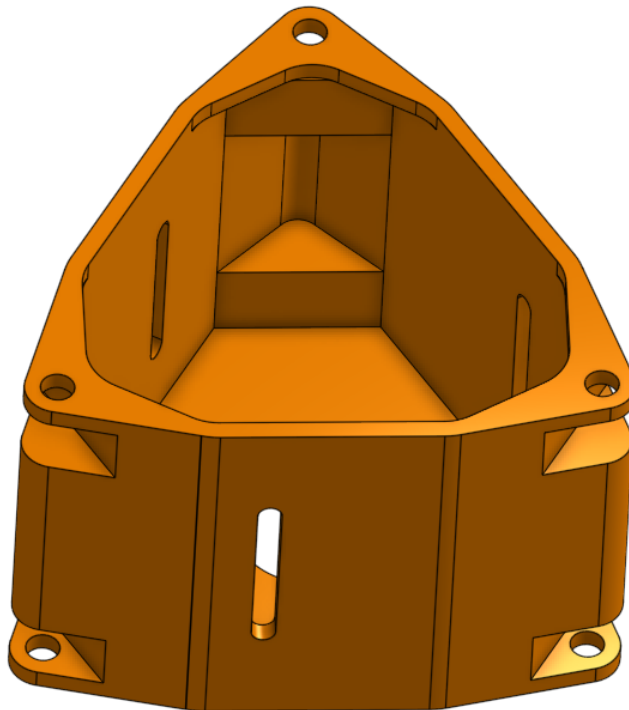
Final winch housing iteration: Angled top view showing interior of expanded notches
